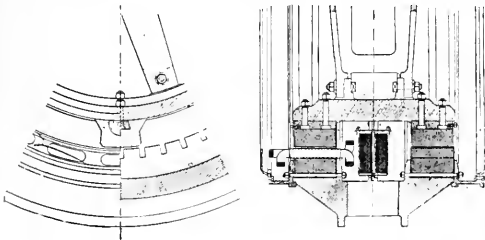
DETAILS OF 700-HP GENERATOR.
